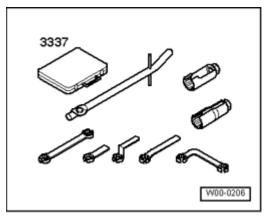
Identifying Ring Spanner 7-Piece Set 3337 Courtesy of VOLKSWAGEN UNITED STATES, INC.
